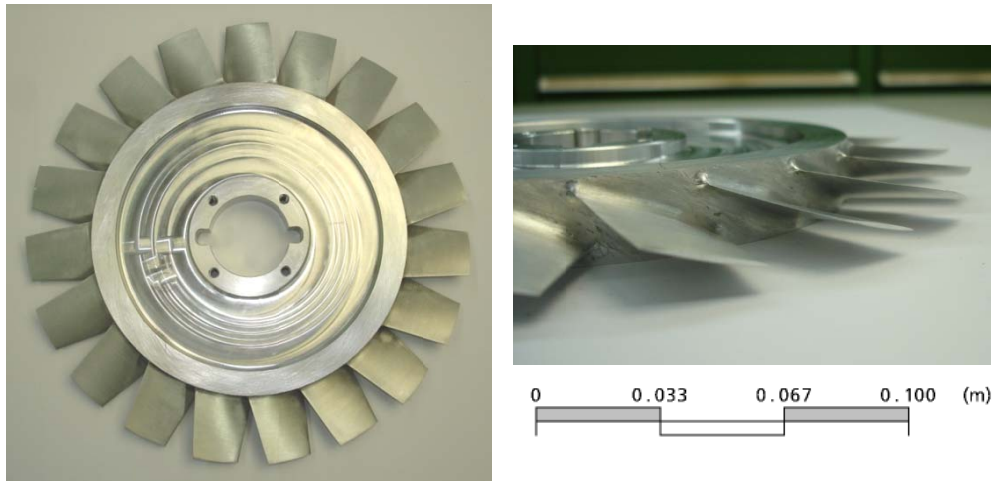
Rotor Blisk with machined Force-Off Threads.
